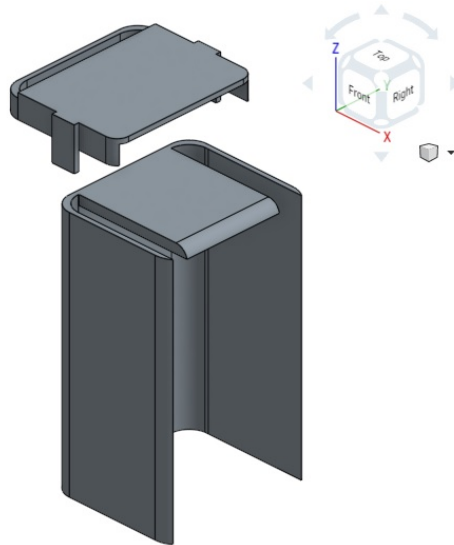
3D model of the bottle container. The 3D printed prototype used in the tests has been designed from this drawing.
